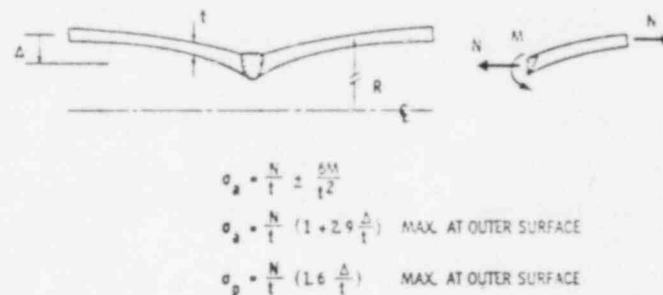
Discontinuity Stress Due to Radial Shrinkage in Welds.
